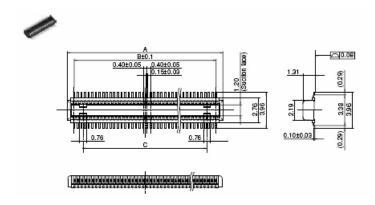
NAIS AXK870145WG board-to-board connector pin side
